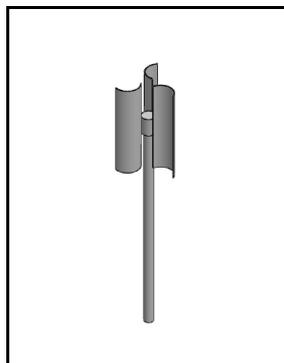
The CAD drawing of Vertical Axis Wind Turbine (VAWT).
